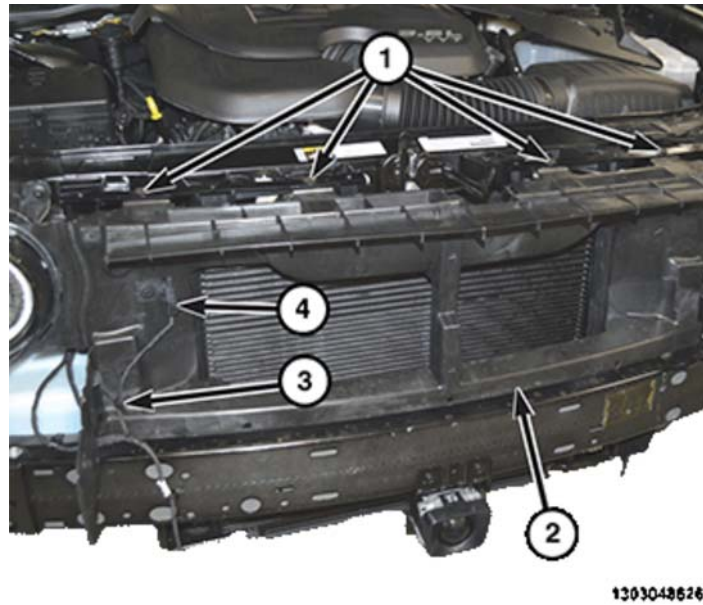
Push-Pin Fasteners, Wire Harness, Support & Connector
